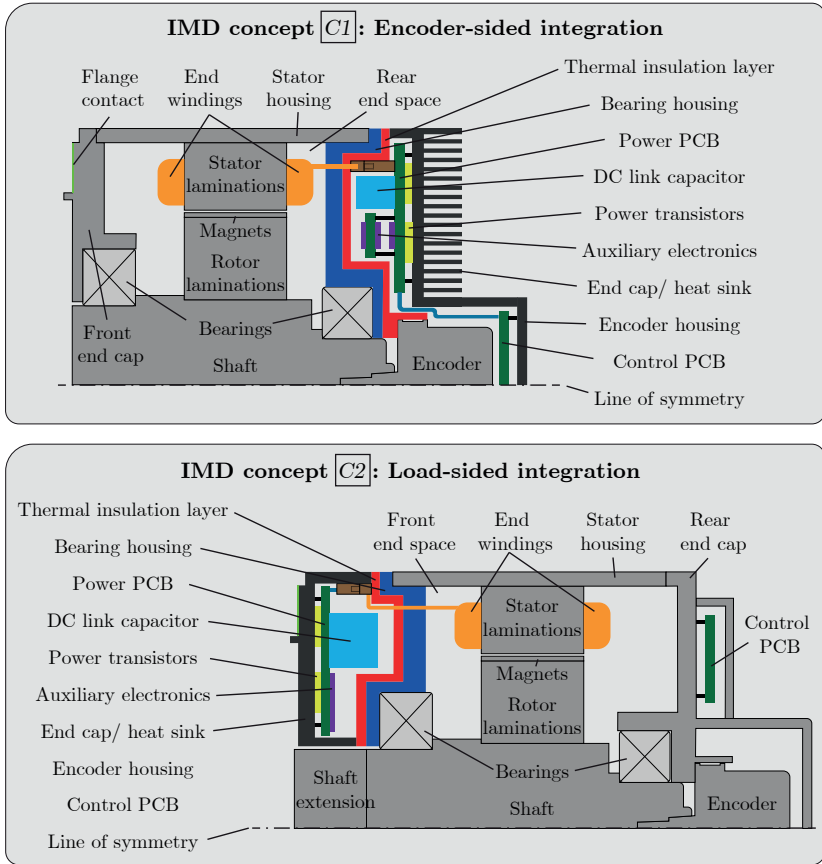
Two thermo-mechanical concepts for integrating an inverter into a flange-mounted SPMSM for high-torque applications. The inverter consists of the shown PCBs, the DC link capacitors, the power transistors, and the auxiliary electronics such as gate driver circuits, sensors, and connectors.
